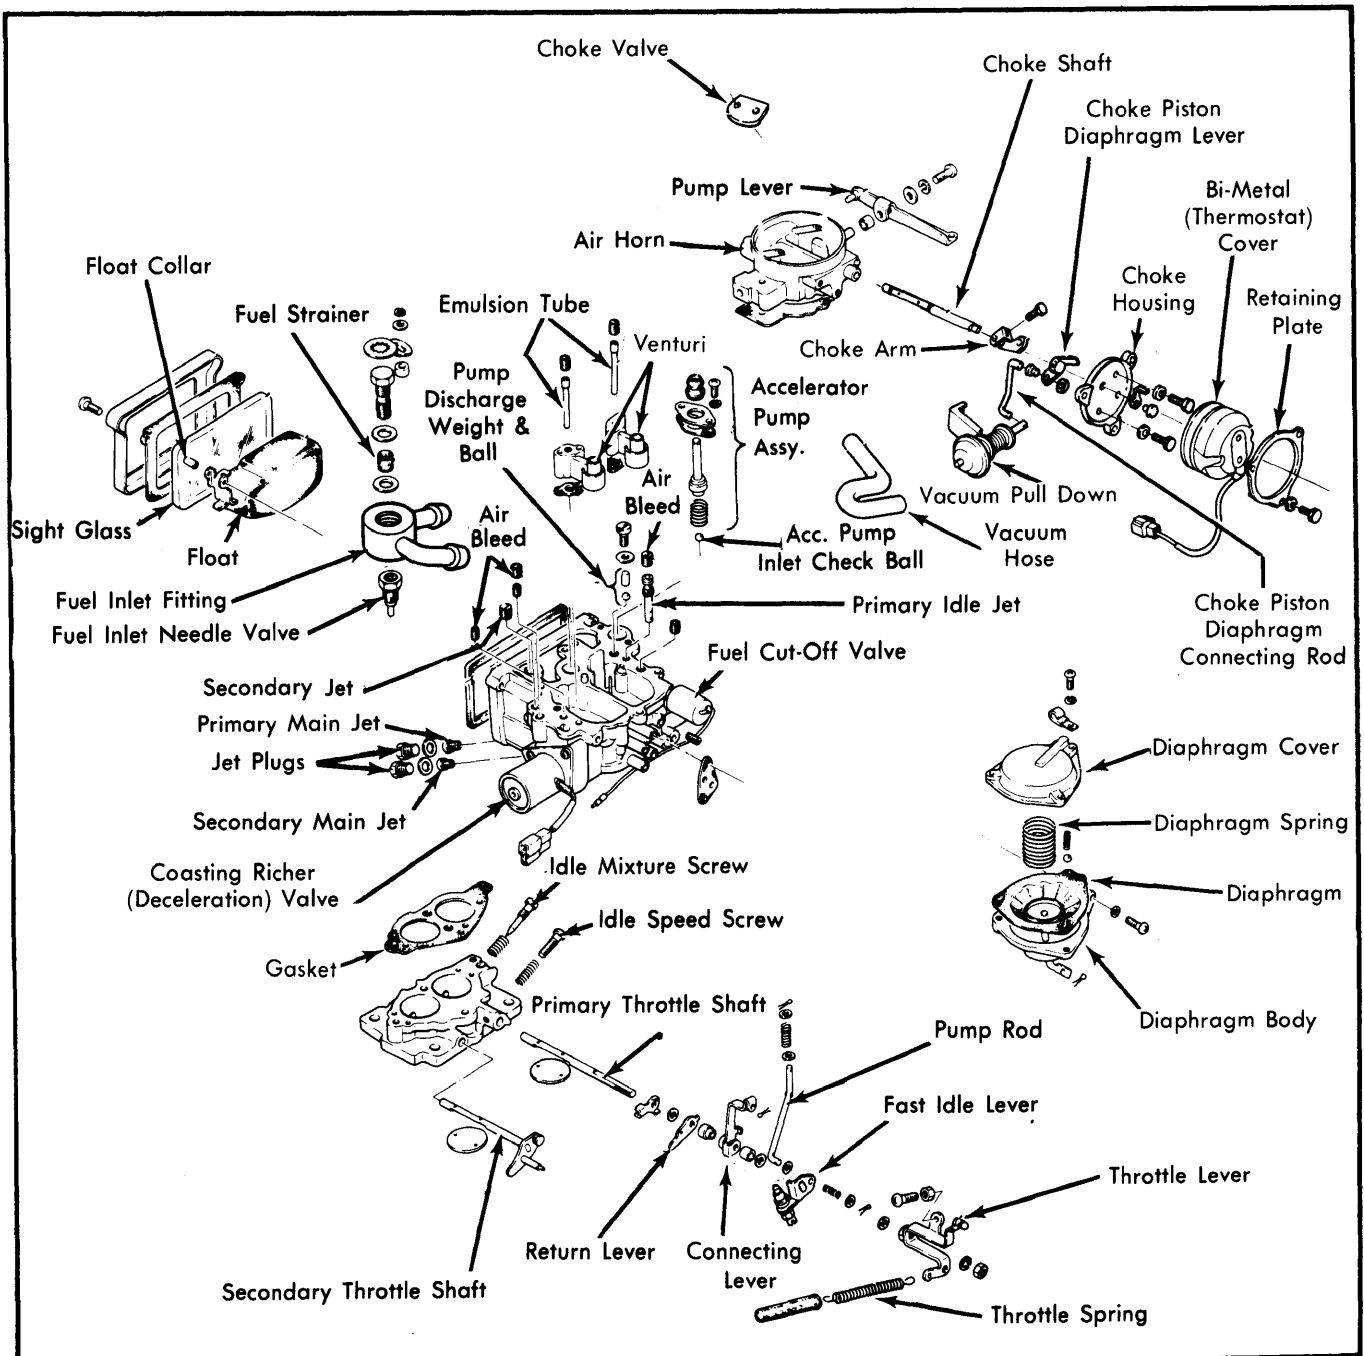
Exploded View of Hitachi DCS 328 2-Barrel Carburetor (Ford Courier 2300)
